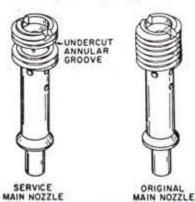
The main nozzle originally installed is drilled after installation through hole in body. Service main nozzles are grooved so alignment is not necessary.
